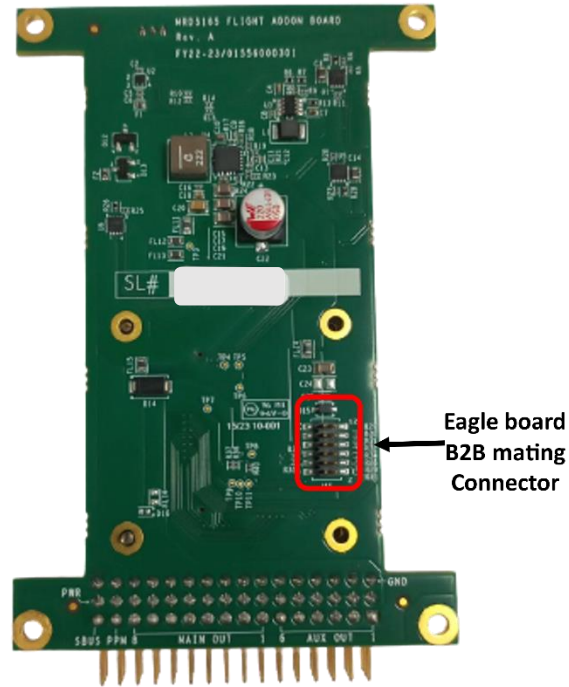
MRD5165 Flight Control Unit - Bottom View
